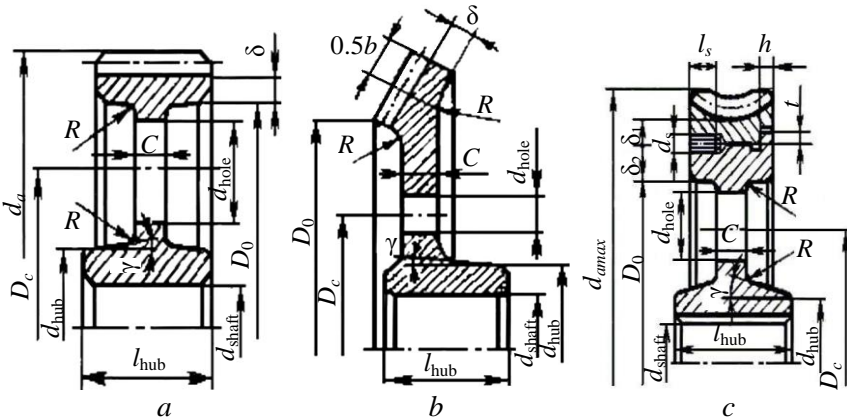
Spur gear (a), bevel gear (b), worm gear (c)
